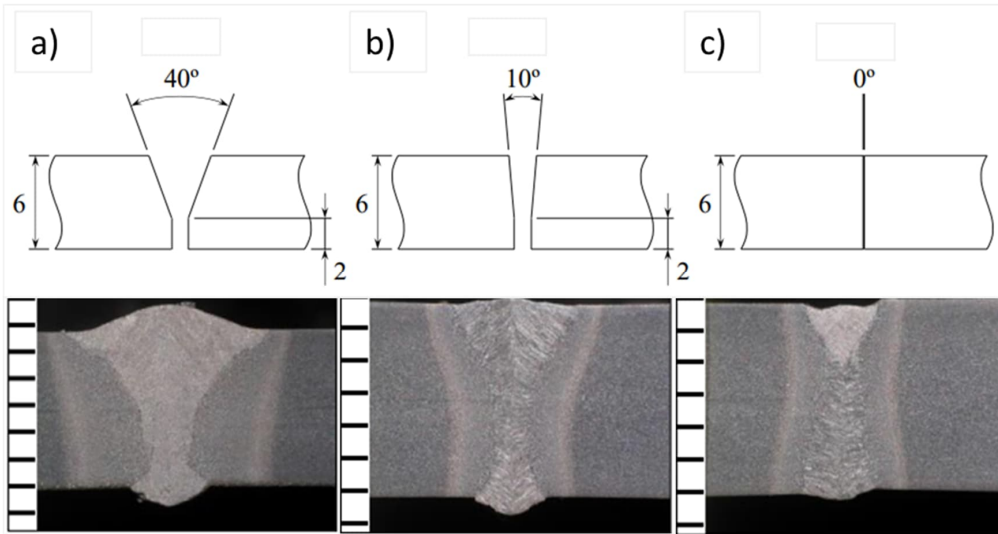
Groove shape and dimensions of a) GMA-welding, b) laser-hybrid welding and c) laser welding. All dimensions and scales in mm.
